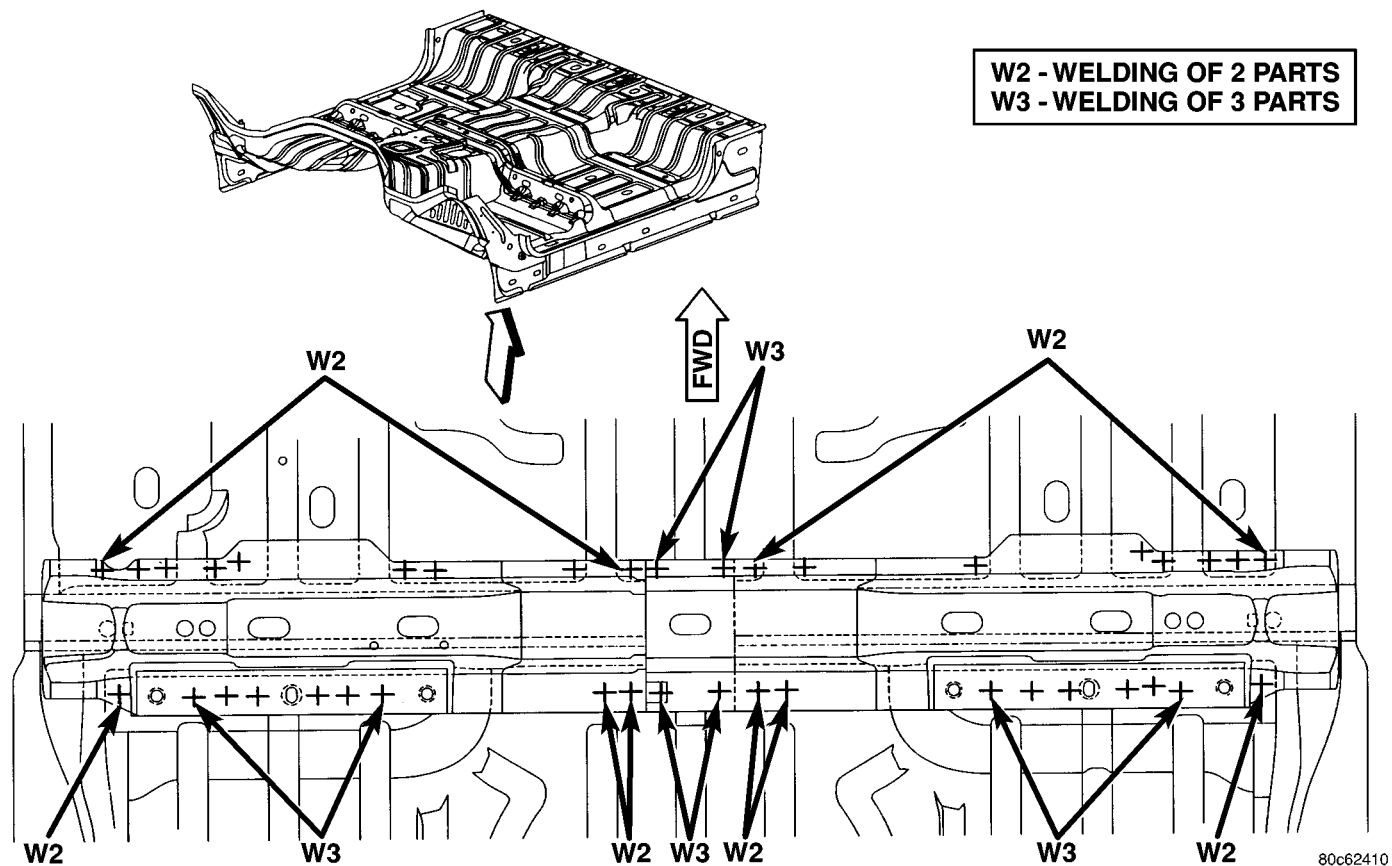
FRONT SEAT MOUNTING CROSSMEMBERS - STANDARD CAB
